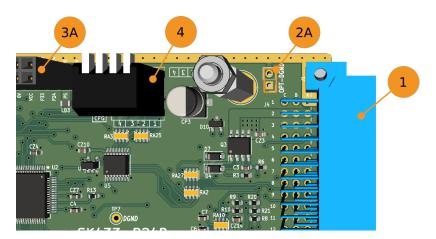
View of the SK433's top side - Details . The secondary board has been removed to show the main (carrier) board only. Circled numbers refer to features detailed in the Section 1.
